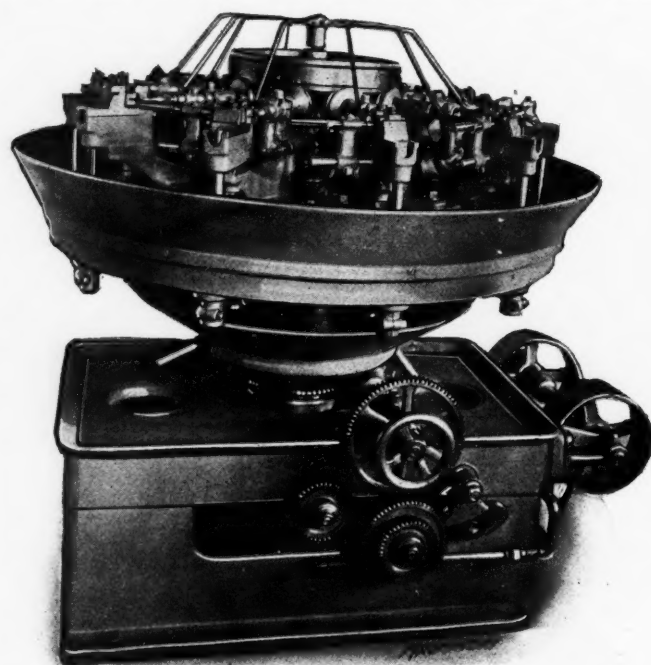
Rear View of Cotter Pin Hole Drilling Machine
